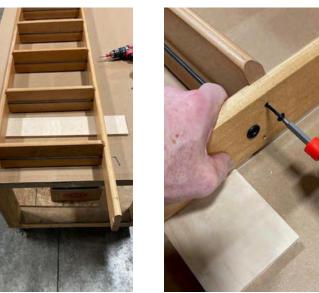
Figure 12 8. When all the steps have been installed, tighten the truss rods completely. (Figure 13) If assembled properly, the ladder side rails will be in tight contact with the plywood spacers (all 4 contact points). There will also be a slight, even gap between the table and the edge of the steps. (Figure 14)
